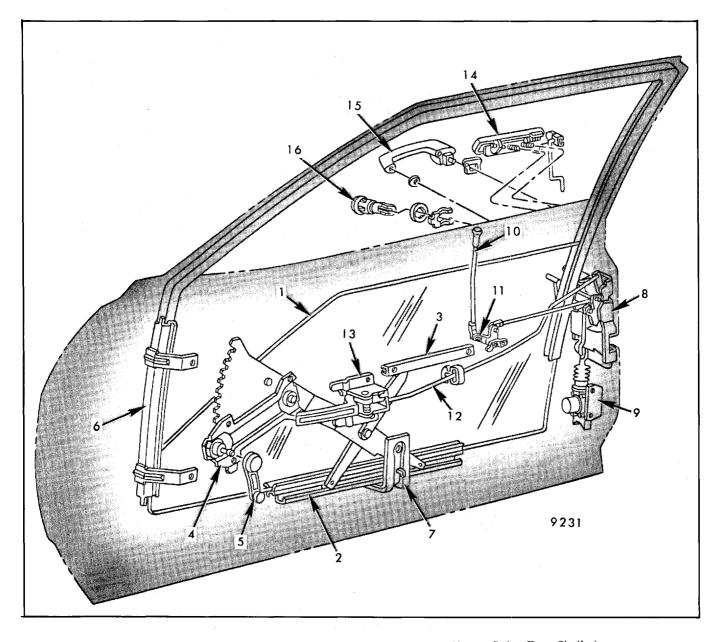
Front Door Hardware - B, C Styles (Coupe Door Shown, Sedan Door Similar)
